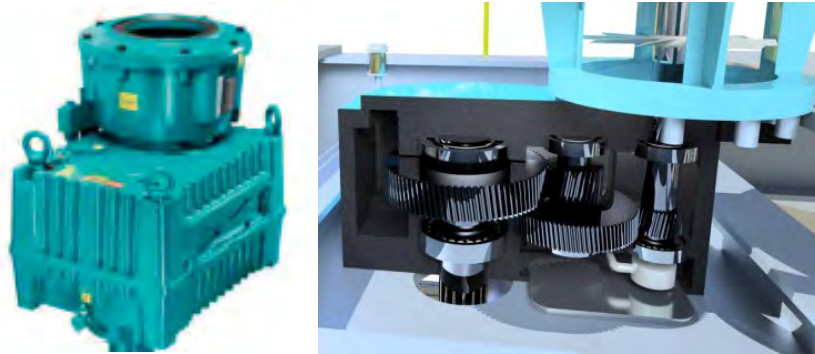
Two-stage Hansen M4ACC gearbox and gears (Hansen Industrial Transmissions, 2004)(Goldschagg, 2013).
